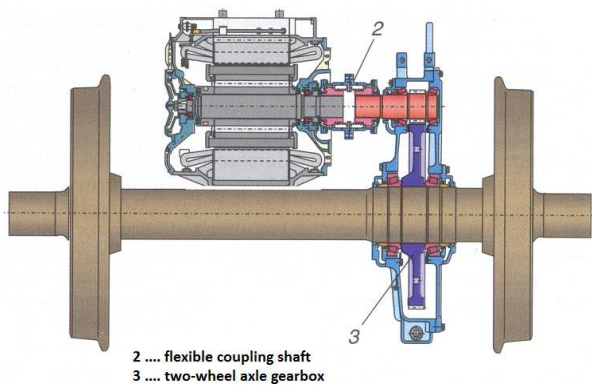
Top detail view of the axle gearbox of the traction drive ICE 3 [3].
